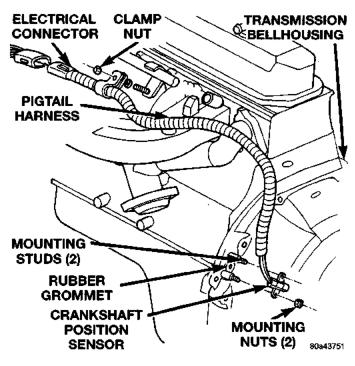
Crankshaft Position Sensor—2.5L 4-Cyl. Engine—Auto. Trans.
